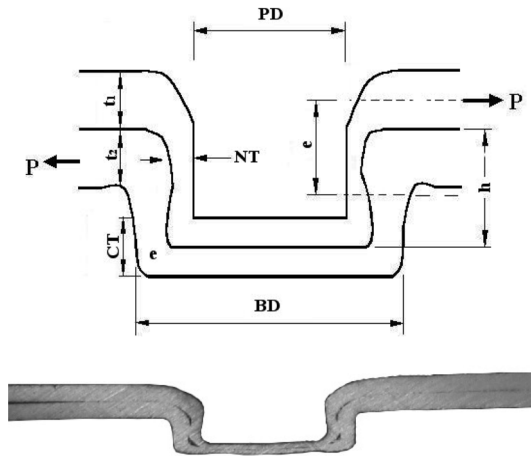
Cross-section drawing and photo of mechanical press joint.
